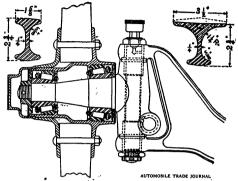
Thomas 1908 Front Wheel and Axleend Construction. The yoke opening is 5 inches. The stub axle pins are one inch diameter, and have hardened and ground ends in hardened and ground bushings. Note the large fillets shown in the I-beam axle section. The front axles are the same in Models "DX" and "F," and are steel drop forgings without a weld.
